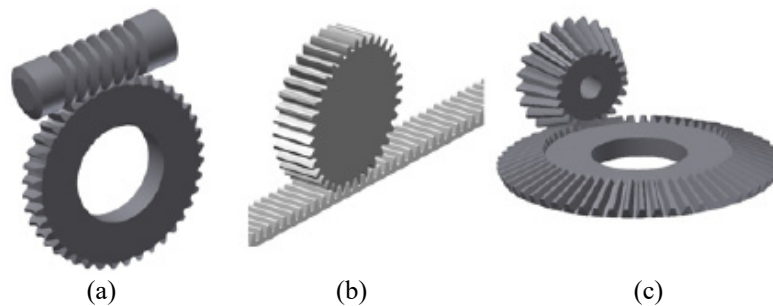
Mechanical (a) worm gear, (b) rack pinion gear, (c) bevel gear [4].
